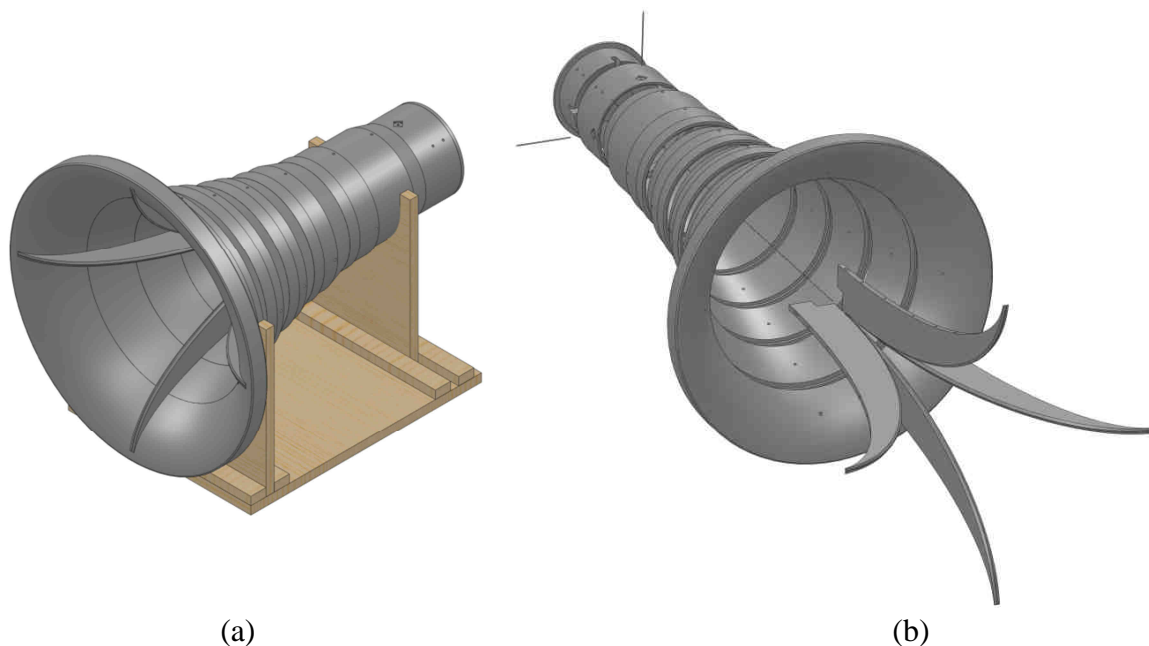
The antenna assembly (a) complete assembly with mounting cradle for pattern measurements and (b) exploded view of the antenna assembly indicating the constituent parts.
